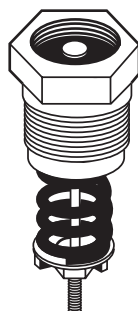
Full Internal Pressure Relief Valve.
